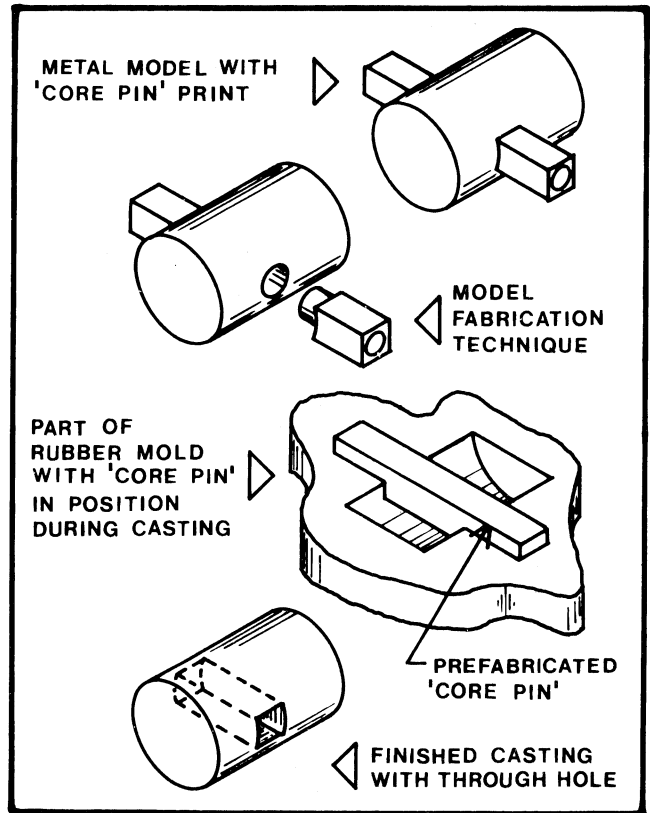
Manufacturing sequence to produce a cored hole through a casting.
